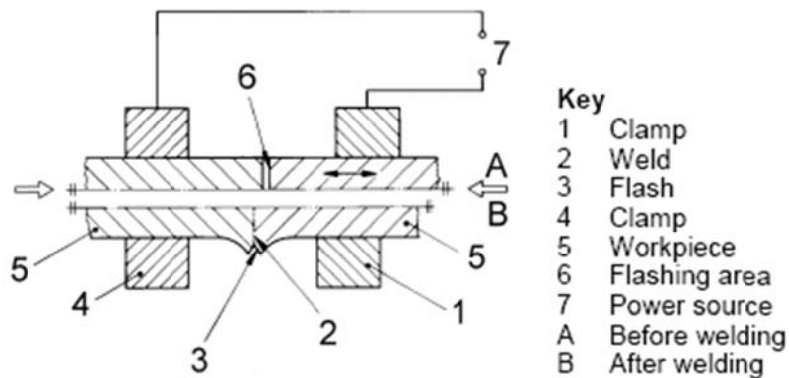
Flash butt welding before and after welding (ISO 669)
